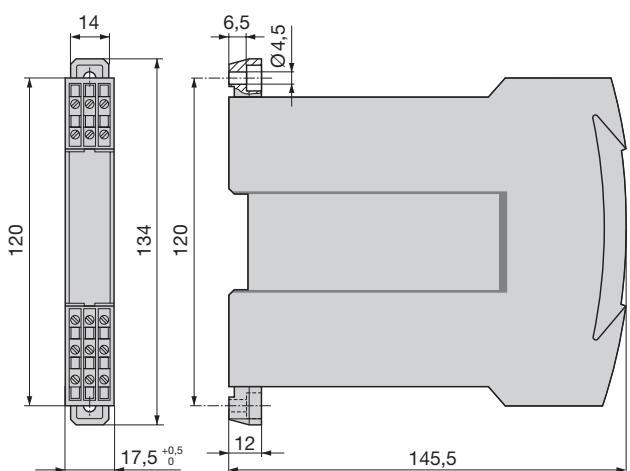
SINEAX PT 602 in housing S17 screw hole mounting brackets pulled out.
